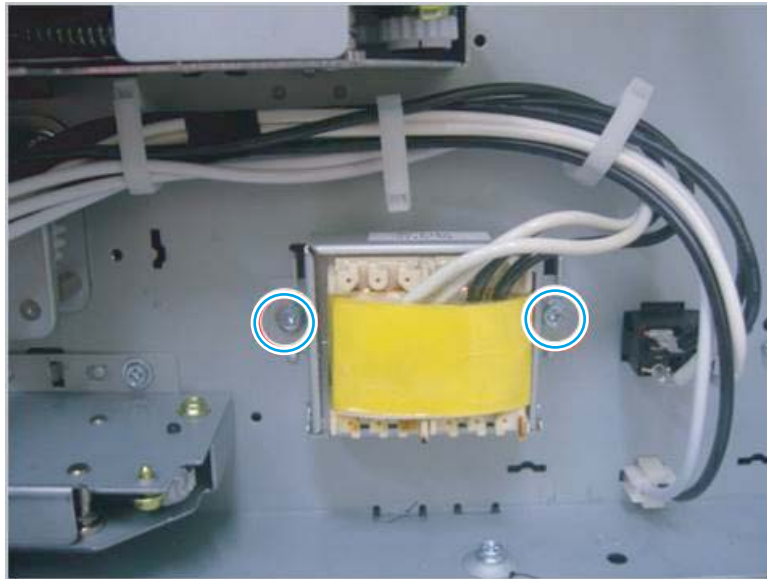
Remove the fuser drive and LVPS boards and cage
